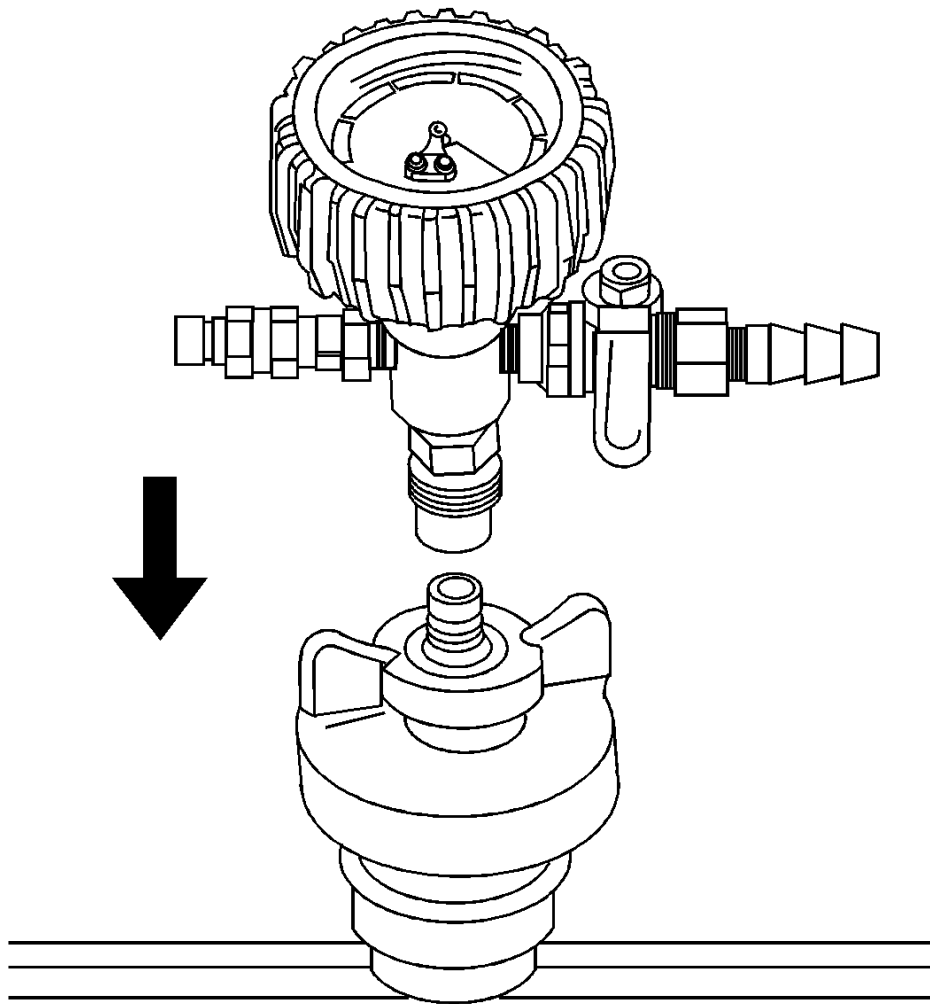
Attaching The Vacuum Gage Assembly To The Vac-N-Fill Cap
